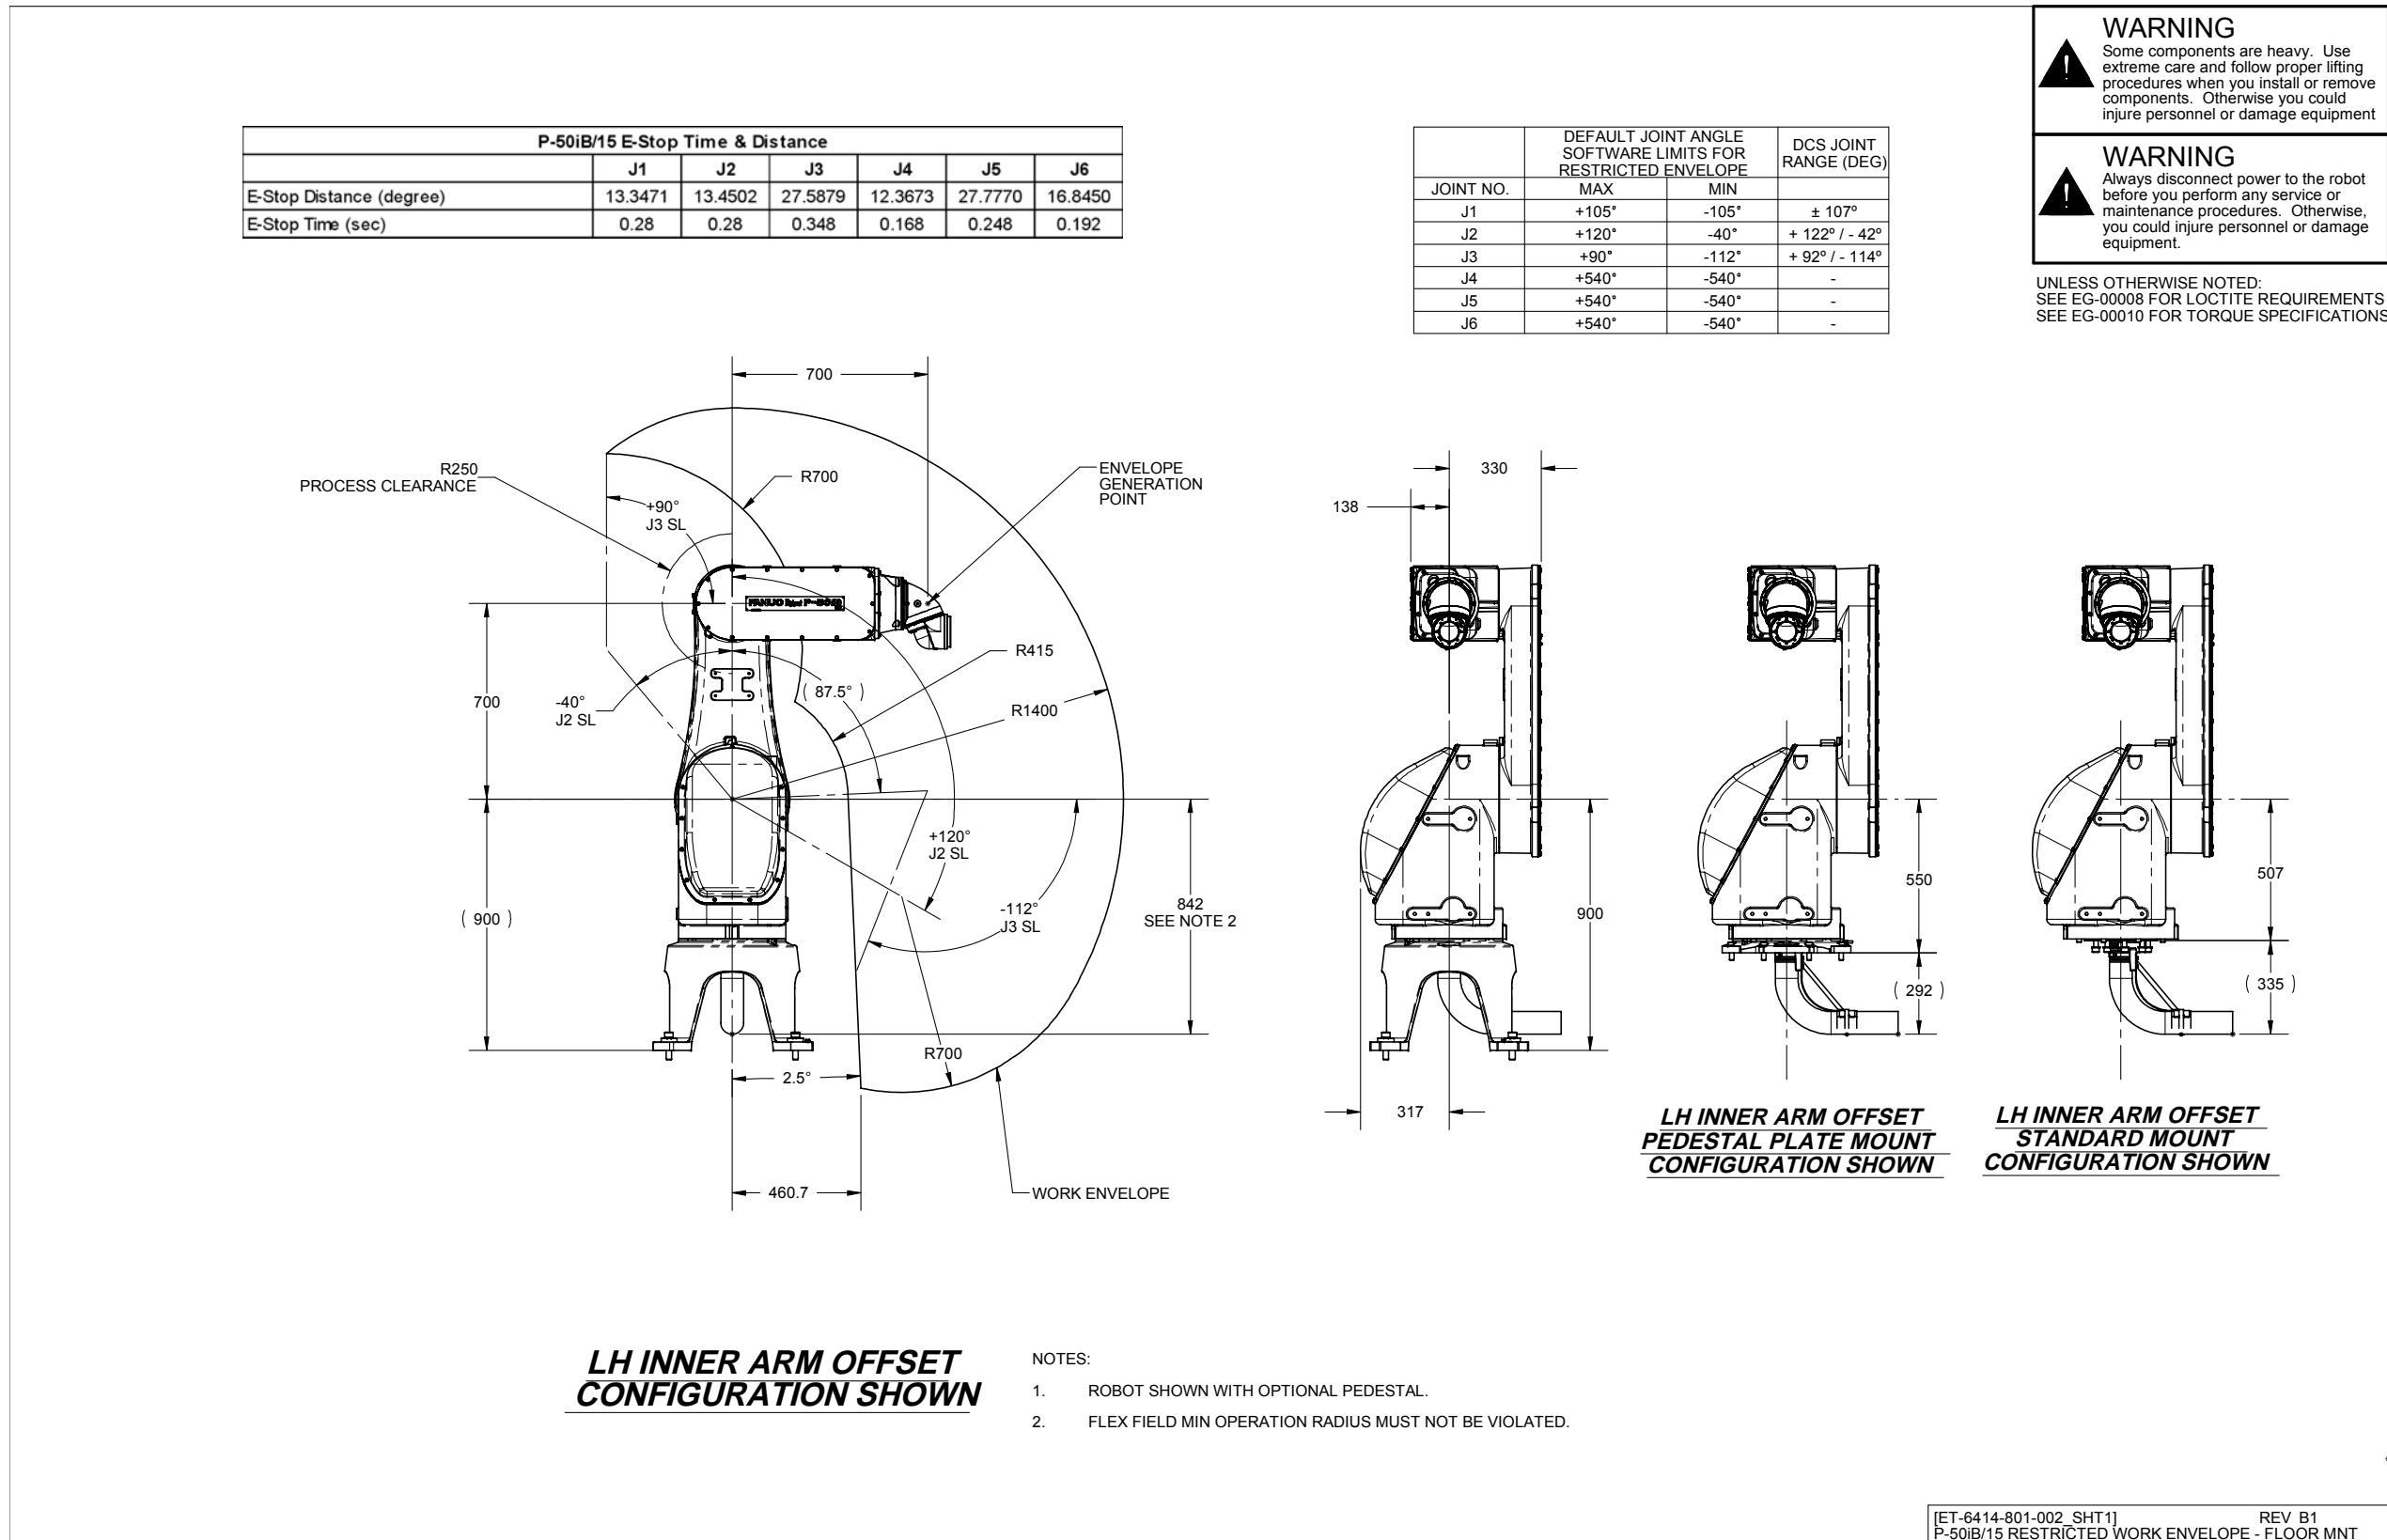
ET-6414-801-002 SHT1, P-50iB/15 RESTRICTED WORK ENVELOPE - FLOOR MNT
